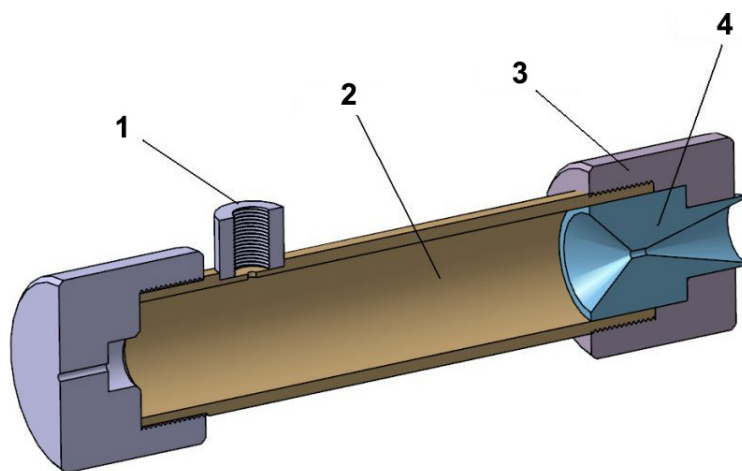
Cross-section of the laboratory motor for propellant ignition and combustion tests: 1 – measurement probe, 2 – case, 3 – head, 4 – nozzle
